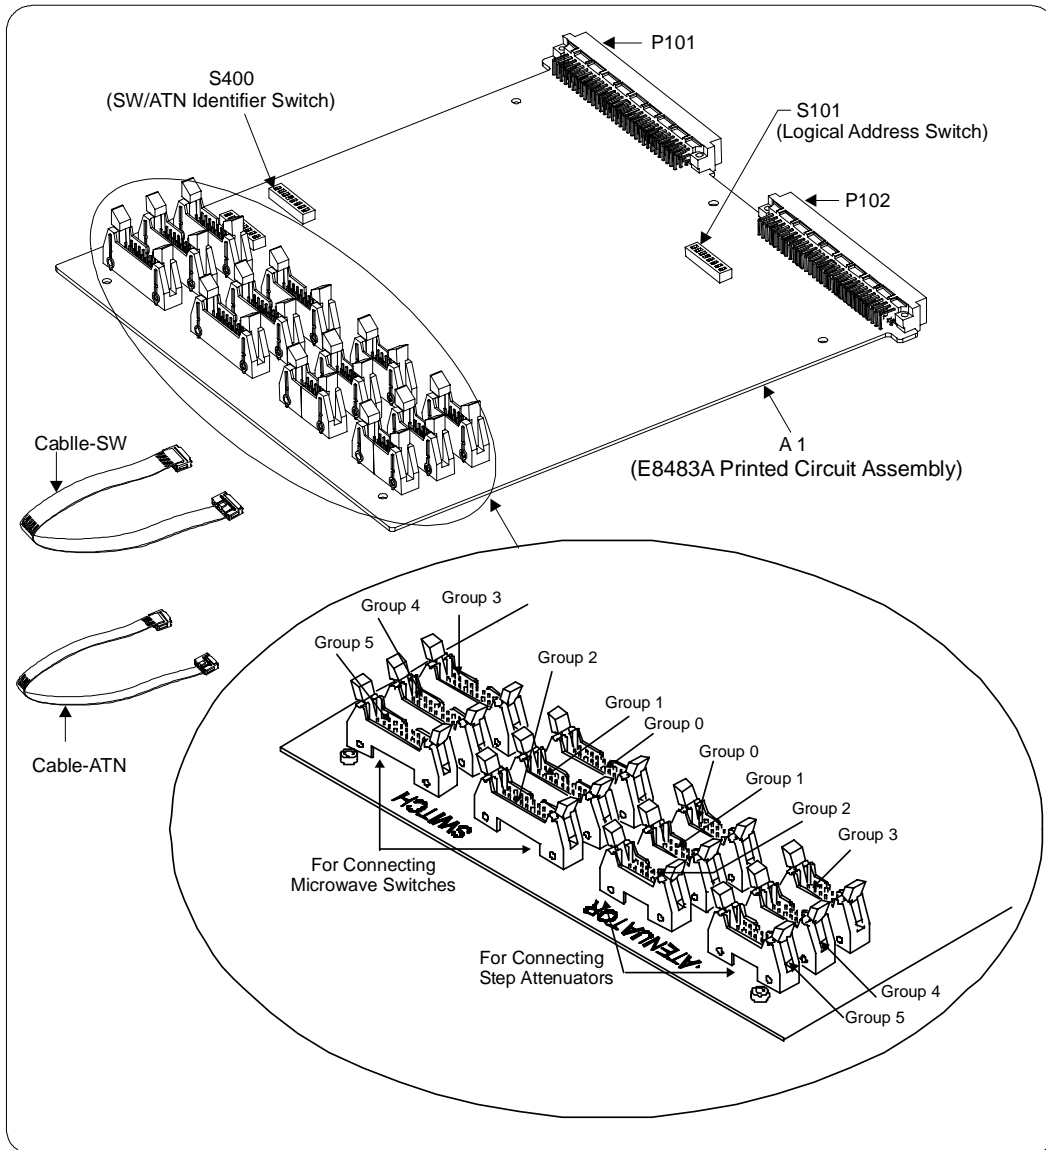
Agilent E8483A Print Circuit Assembly Board
